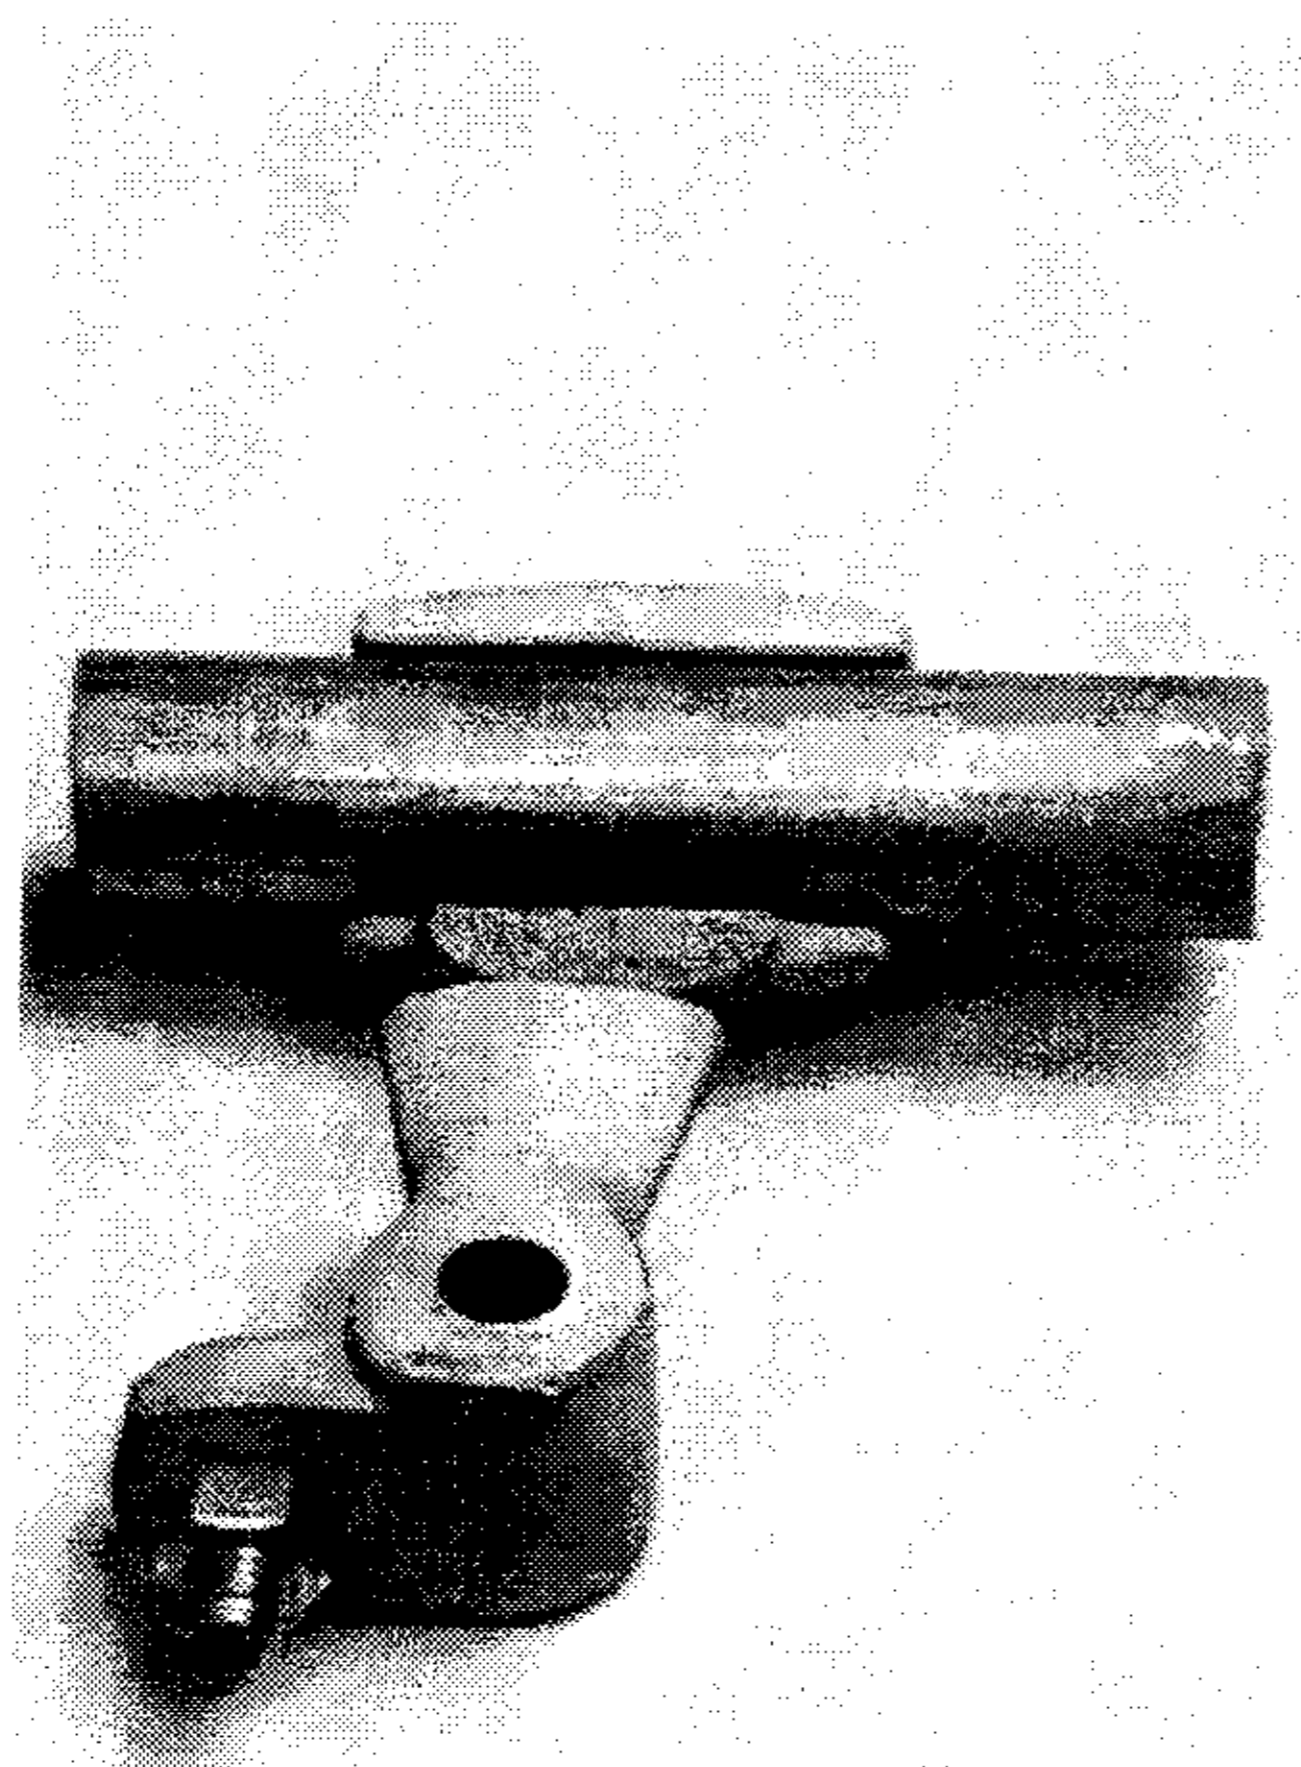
Fracture of sleeve clamp in tension.
